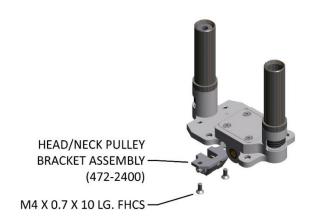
Attach Head/Neck Pulley Bracket to Head/Neck Mounting Platform
